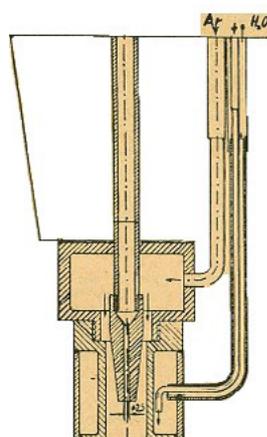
Gas-electric MIG welding nozzle [16]
